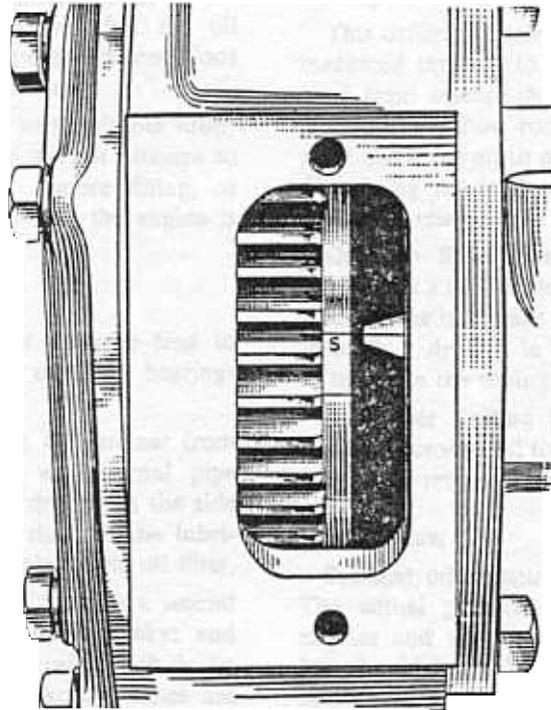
Diagram showing fuel pump gear and scribed lines'
